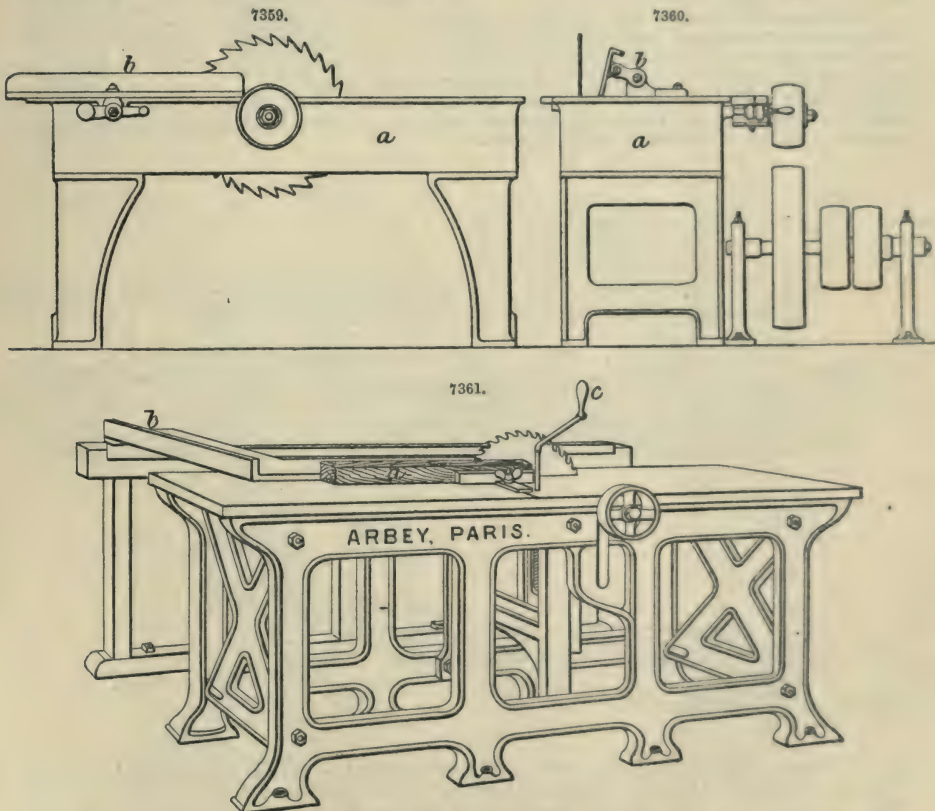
is a saw-bench arranged for both slitting and cross cutting; the gauge *a* is used in slitting, and can be removed while the traversing table is used for cross cutting. The saw with the mandrel and pulley is raised or lowered by means of a sliding frame *d*, operated by the winch *c*, so that the saw may be projected through the top of the bench to any height required, and within its capacity. This arrangement is used for cutting grooves or rebates, and in any case where the saw is to cut to a specific depth.
